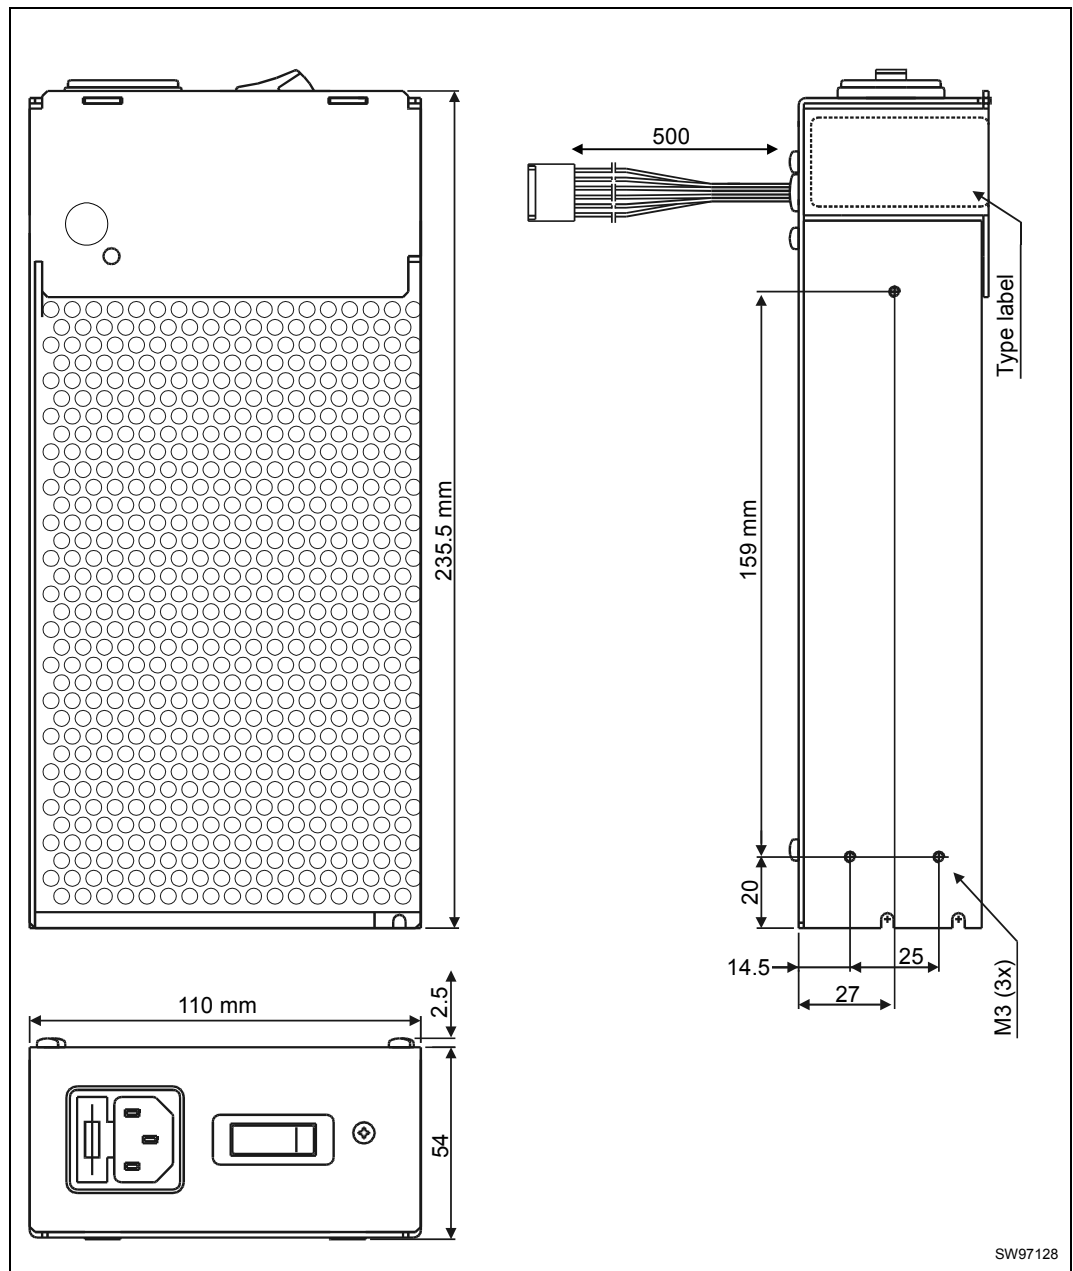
Power supply 01035-002 dimensions. All measurements are in mm.
